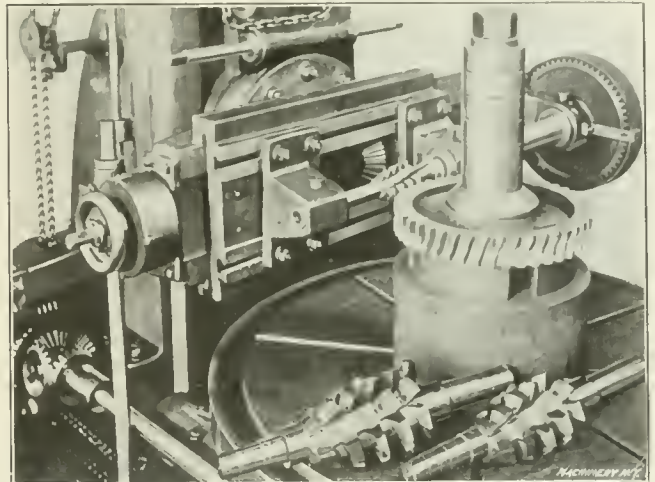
Hobbing a Worm-wheel with a Taper Hob
